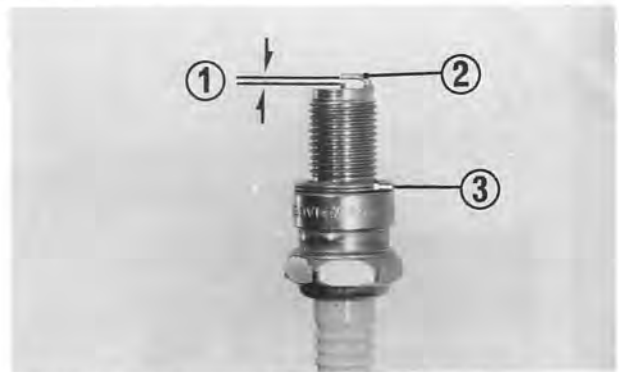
(1) Plug gap (2) Side electrode (3) Sealing gasket
